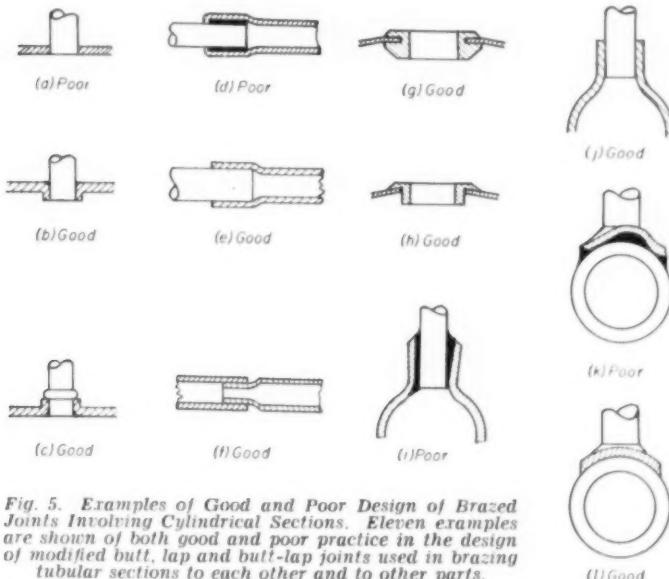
Examples of Good and Poor Design of Braze Joints Involving Cylindrical Sections. Eleven examples are shown of both good and poor practice in the design of modified butt, lap and butt-lap joints used in brazing tubular sections to each other and to other parts.
